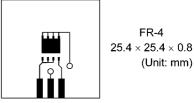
Device Mounted on a Glass-Epoxy Board (b)
